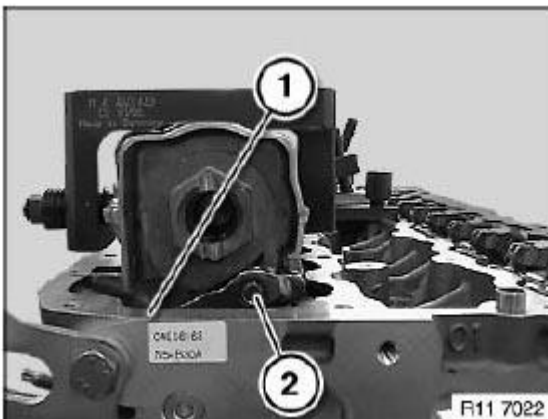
Identifying Intake Camshaft And Roller Cam Follower
